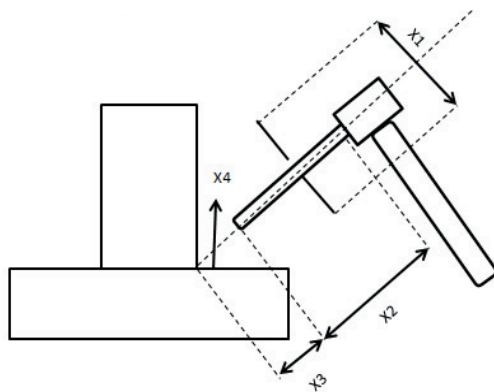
Experimental setup for Fillet weld by Shielded Metal Arc welding.
